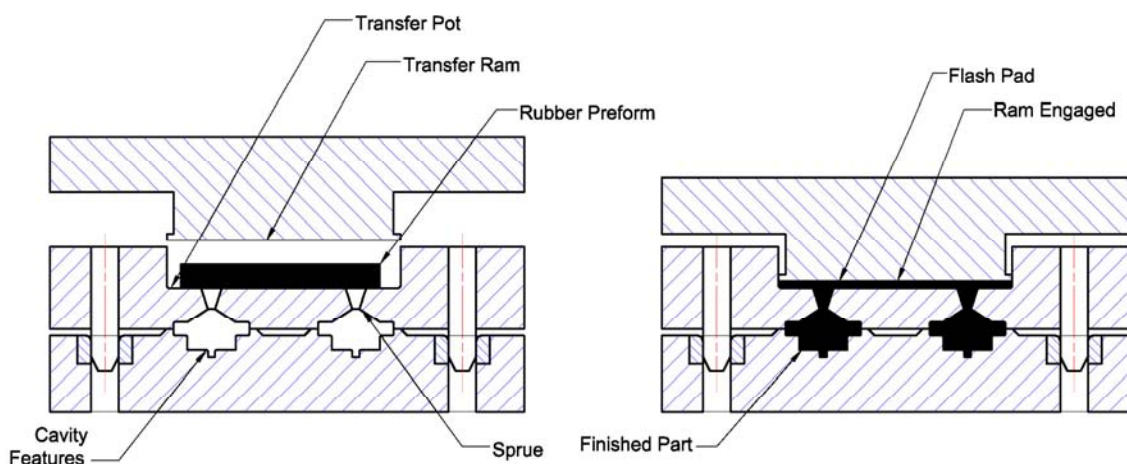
Transfer molding for rubber molded objects production (reproduced from twistertechnology.com/)
